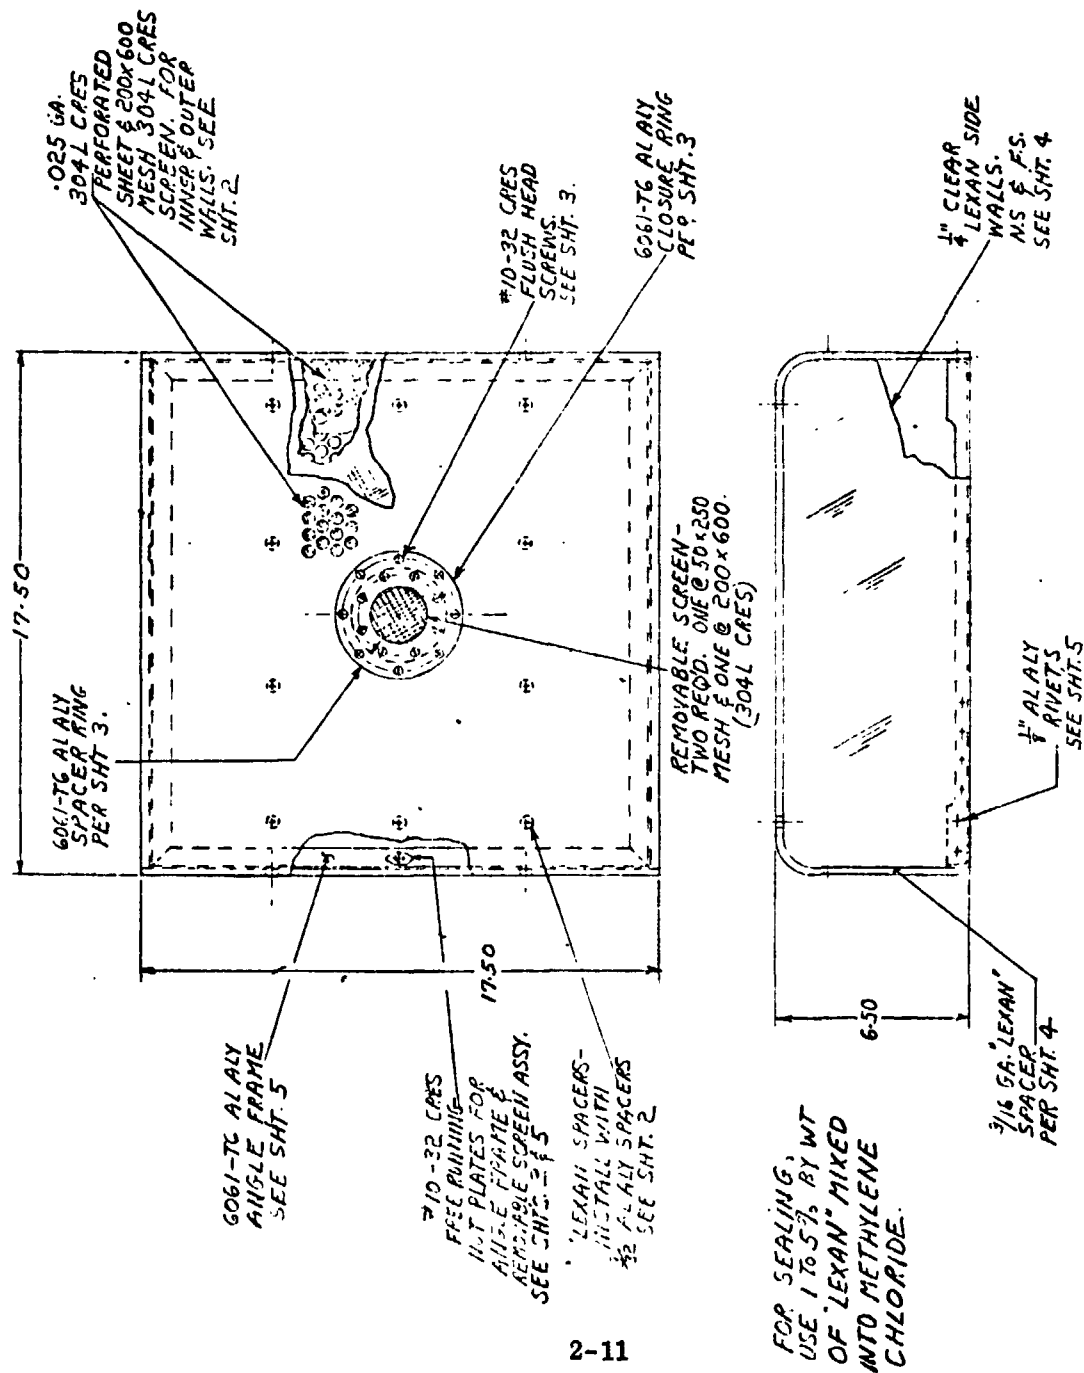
Inner Basket Assembly/Refilling Test Apparatus (Sheet 1 of 5)
